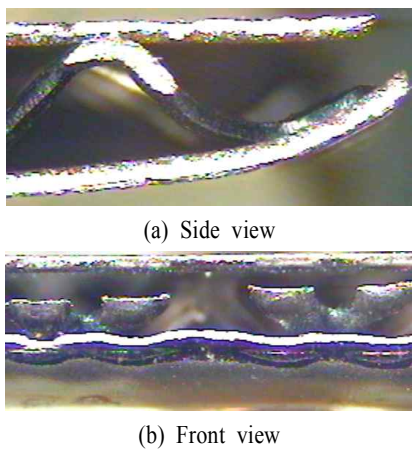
Sheared surface of ISB sheet metal at position 2 (resistance-welded)
